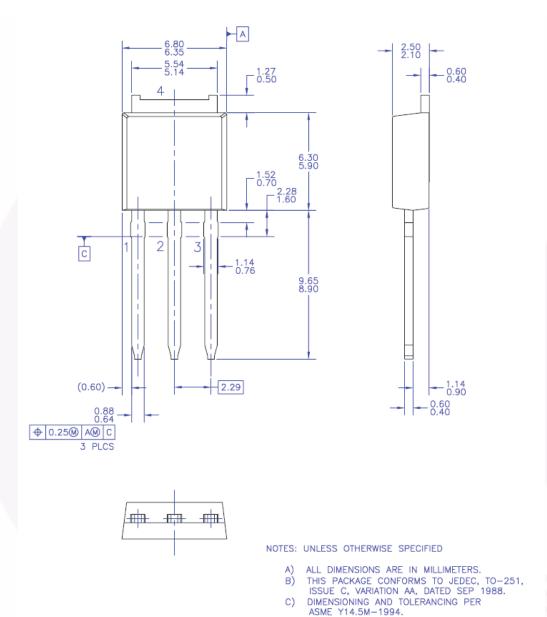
TO251 (I-PAK), Molded, 3-Lead
